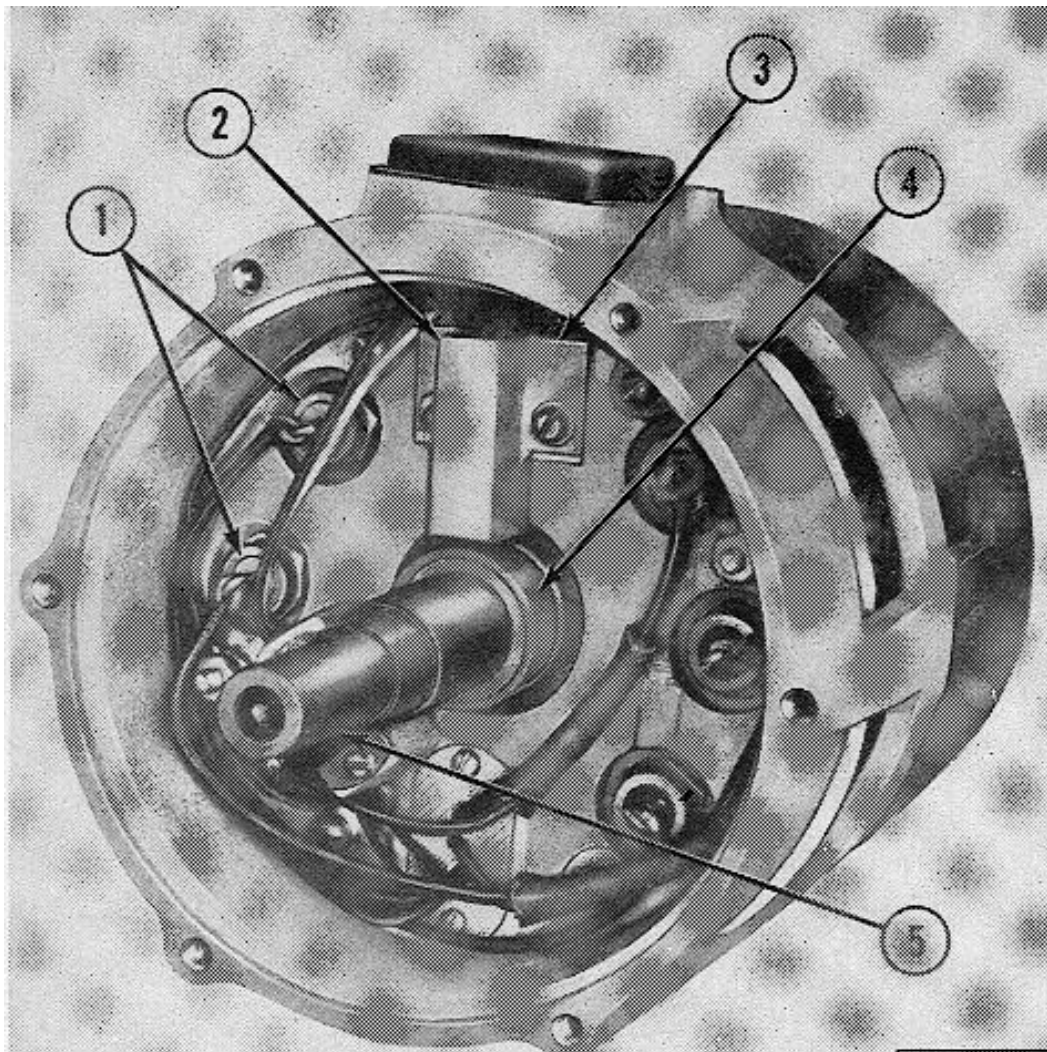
REMOVING DRIVE END HOUSING
